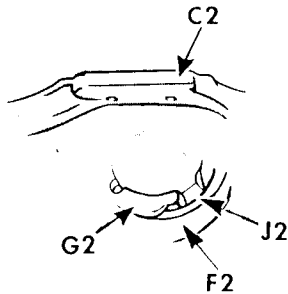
Removing Sewing Hook (Correct Position of Thread Guard
